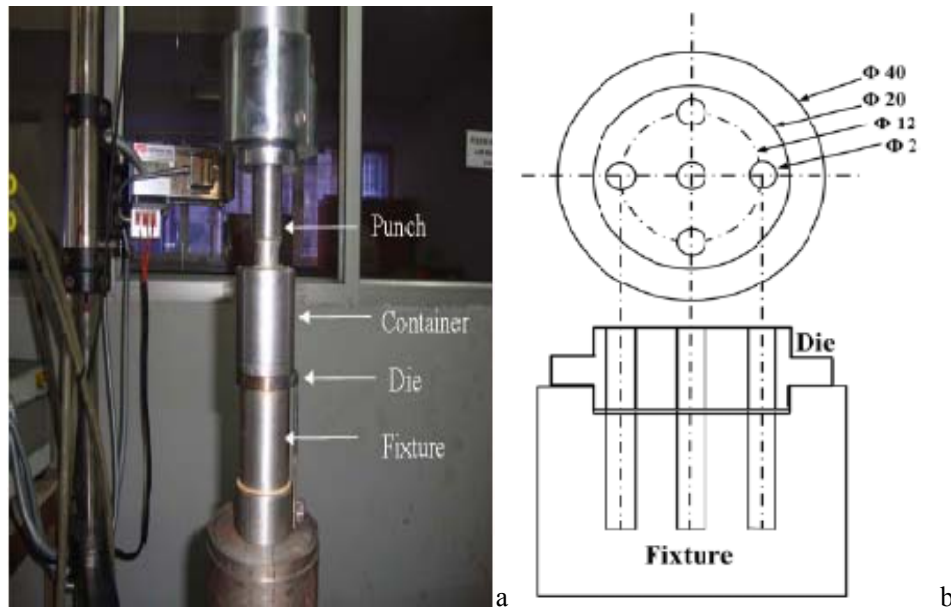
Experimental set up (a) photograph (b) drawing of die-fixtured assembly.
